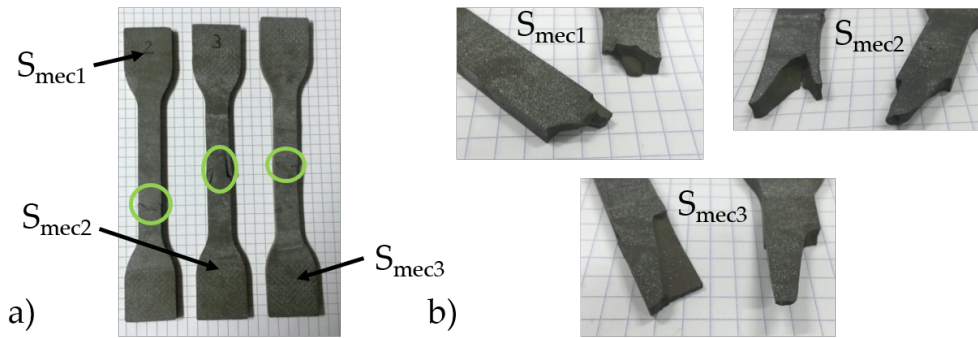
Fractured specimen with an indication of the fracture position on the specimen (a) and zoom on the fractures (b).
